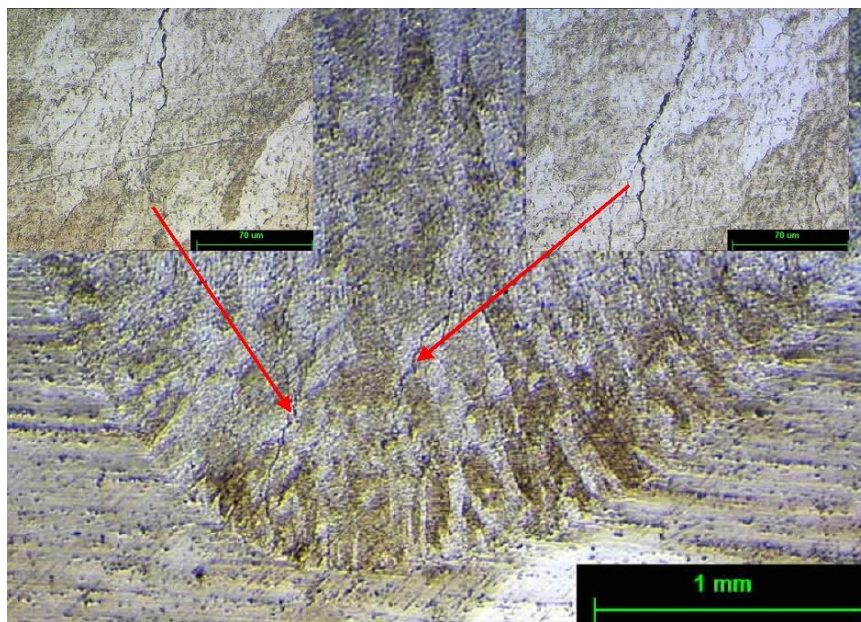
Micro cracking in weld bead exhibiting a papillary bead profile – high pulse welding current employing filler Al-2319 on Al-2024 base material.
